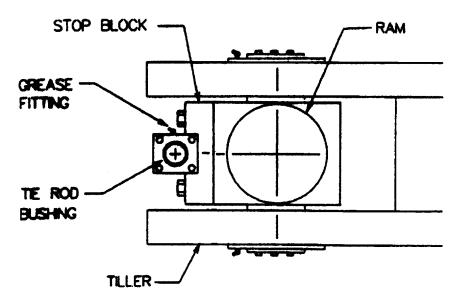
Stop Block and Tie Rod Bushing Assembly
